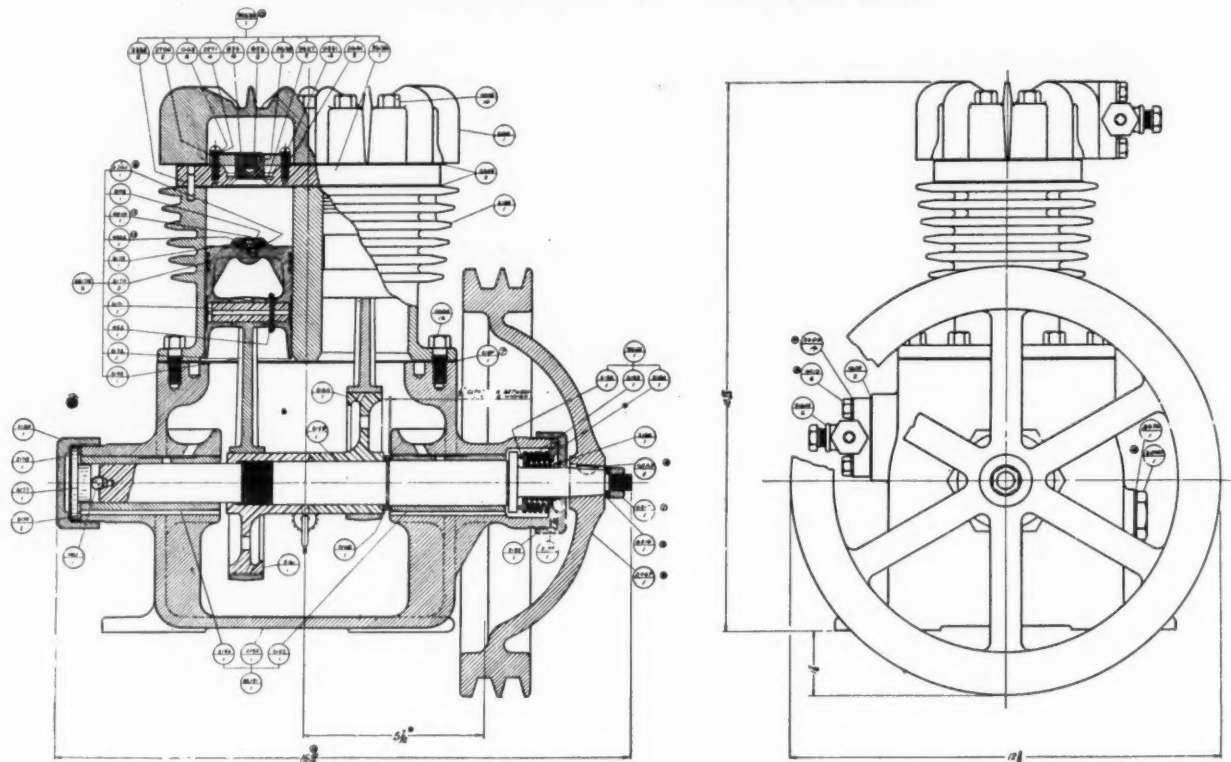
Cut-away section (left) and end view (right) of series "H," "I," and "J" Absopure commercial compressors. Field service operations for these machines are described herewith.
